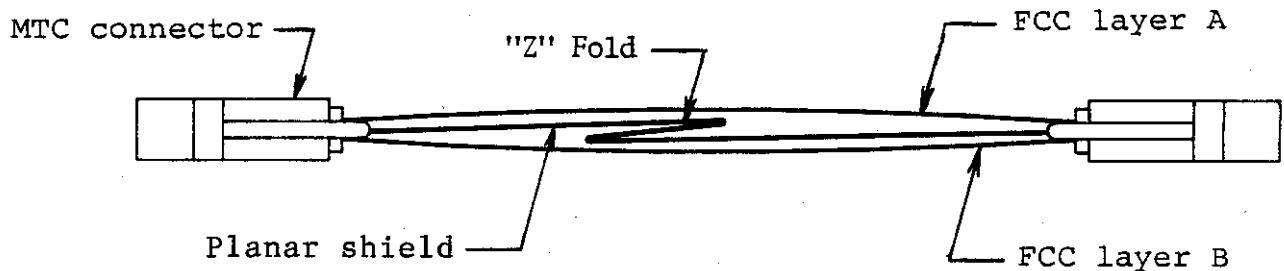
Location of Planar Shield in FCC Cable Assembly
